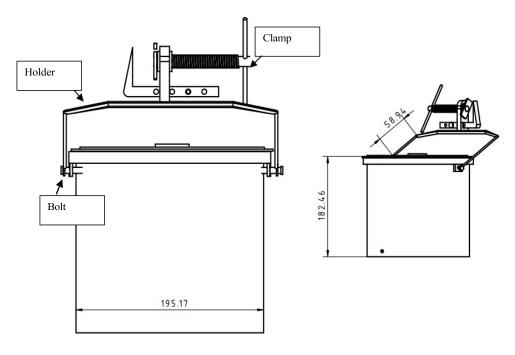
Prototype design using FreeCAD (dimensions in mm)
